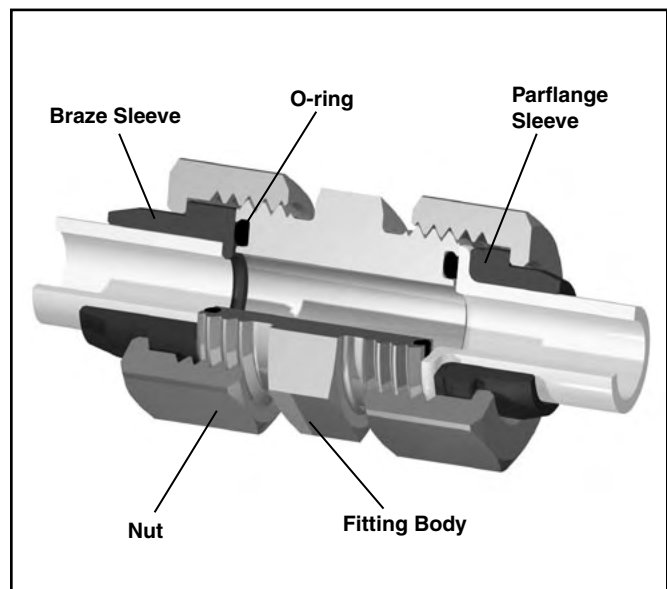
Seal-Lok Lite union cutaway with flanged and brazed assemblies
